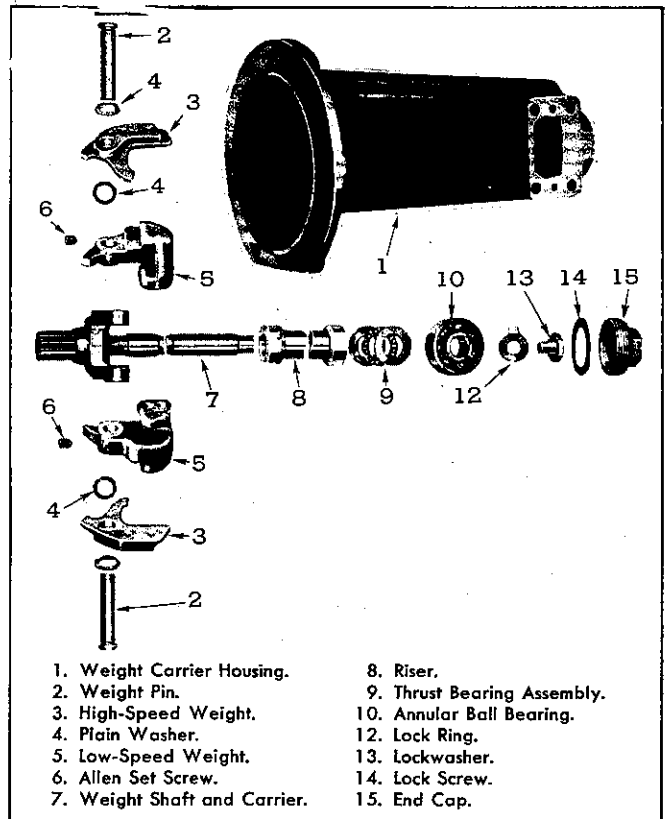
Governor Weight and Housing Details and Relative Location of Parts (Early Models).
